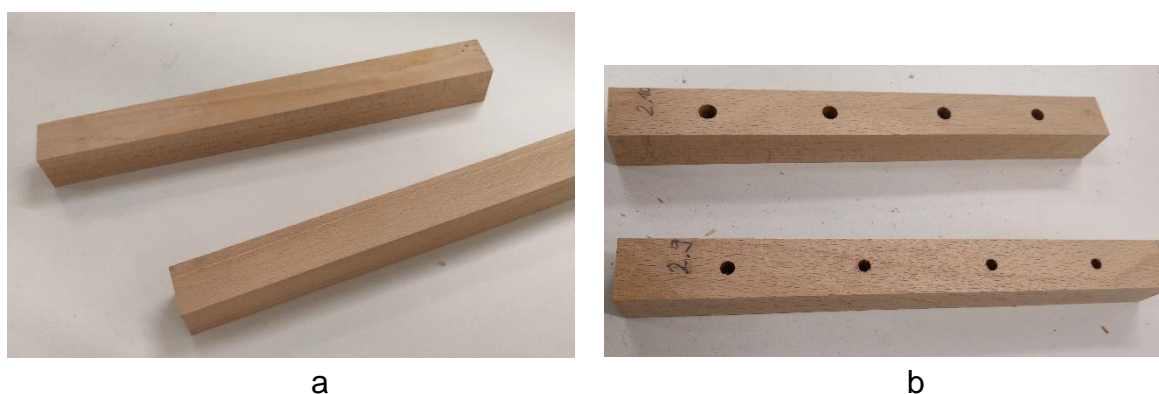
Beech elements: a) before drilling, b) after drilling the hole
